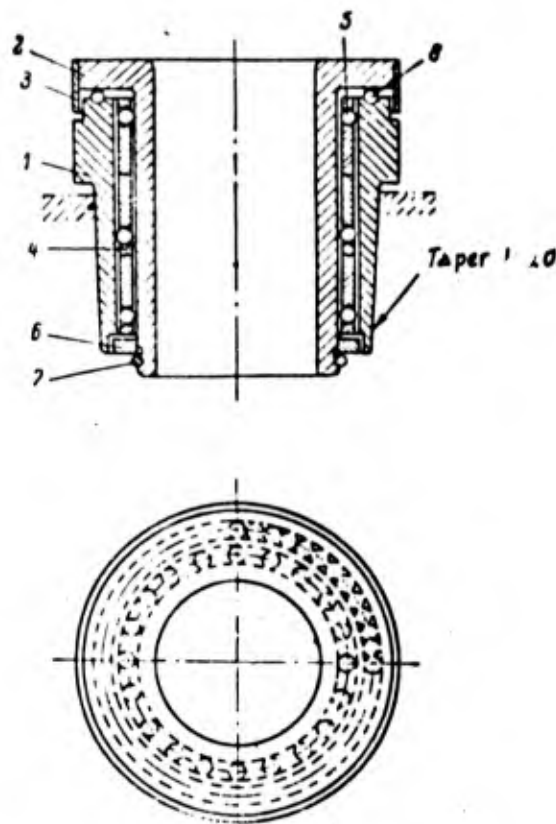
Rotary Guide Bushing, Mounted on Ball Bearings
